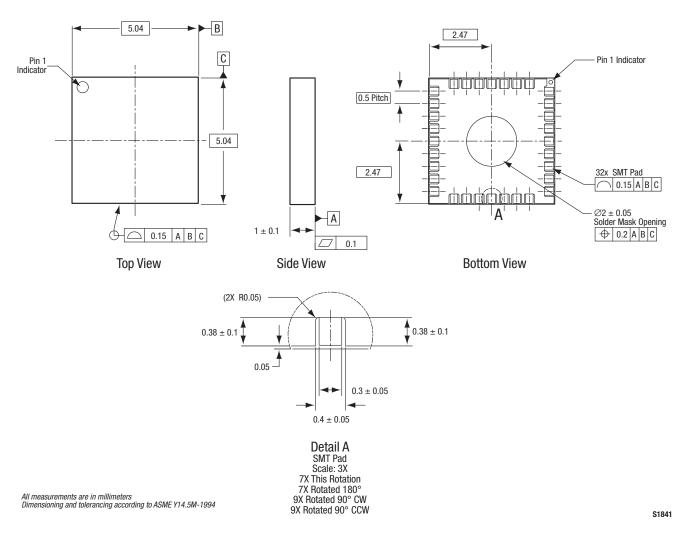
SKY73134-11 32-Pin RFLGA Package Dimensions
